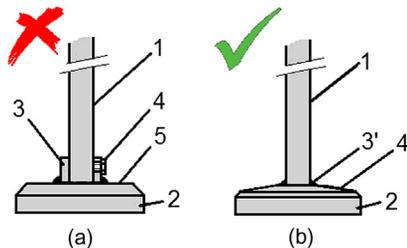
(a) Foot spindle (1) is inserted into a bush (3) which is welded to a foot base (2). The foot spindle is rigidly fastened to the foot base by means of a screw (4). This foot is not hygienically designed because the upper part of the foot base forms a non-drainable flat surface (5). Debris and water may collect into the crevice formed between the inner surface of the bush and the inserted part of the spindle, and around the fastening (4). (b) The foot spindle (1) is all-around flush welded (3') to the foot base (2) from which the upper surface parts (4') are now sloped to make them drainable (Hauser, 2008b).
